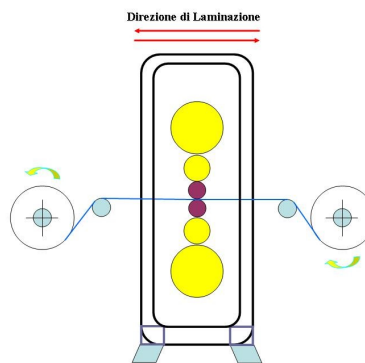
"Six High" cold rolling mill scheme, version 2
